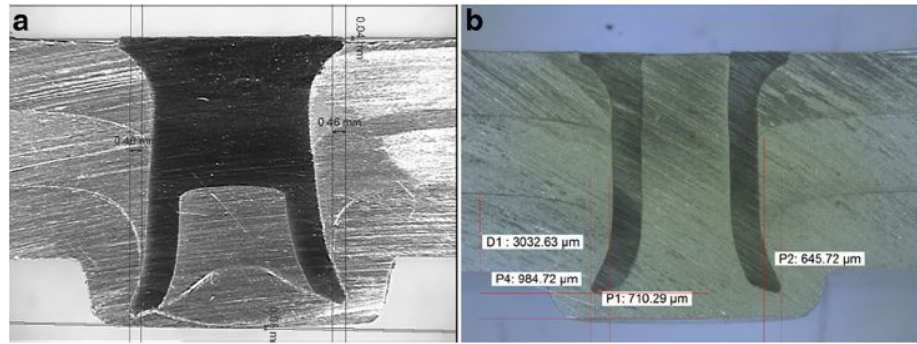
The three sheets joined by (a) a semi-tubular the SPR rivet and (b) a full-tubular the SPR rivet
